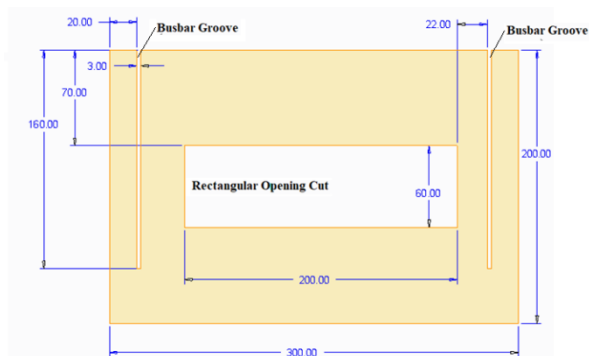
Acrylic Top Plate Dimensions, all dimensions are in (mm)
